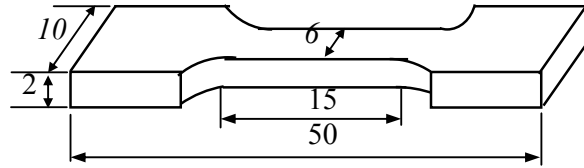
Shape and dimension of a tensile test specimen (mm).
